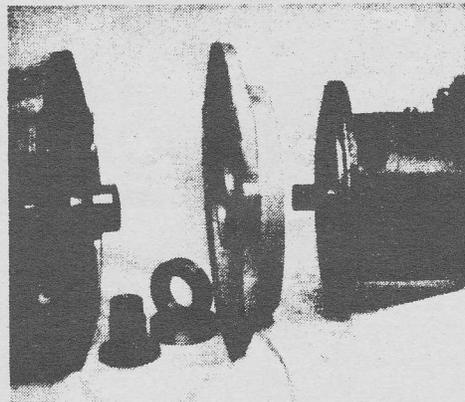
One adapter face fits the flywheel housing. The other fits the motor.
